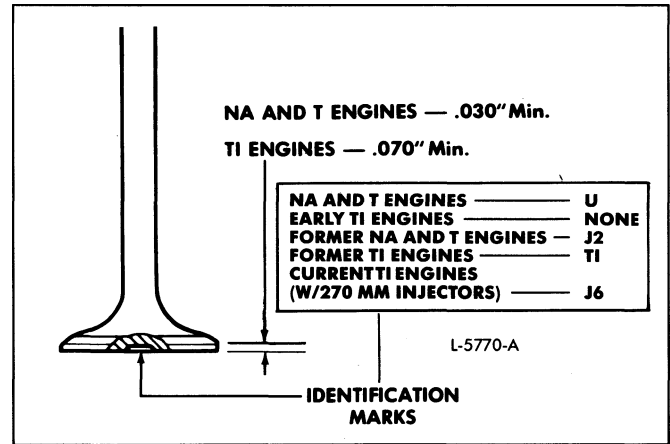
Exhaust Valve Re grind Limits and Identification Marks
